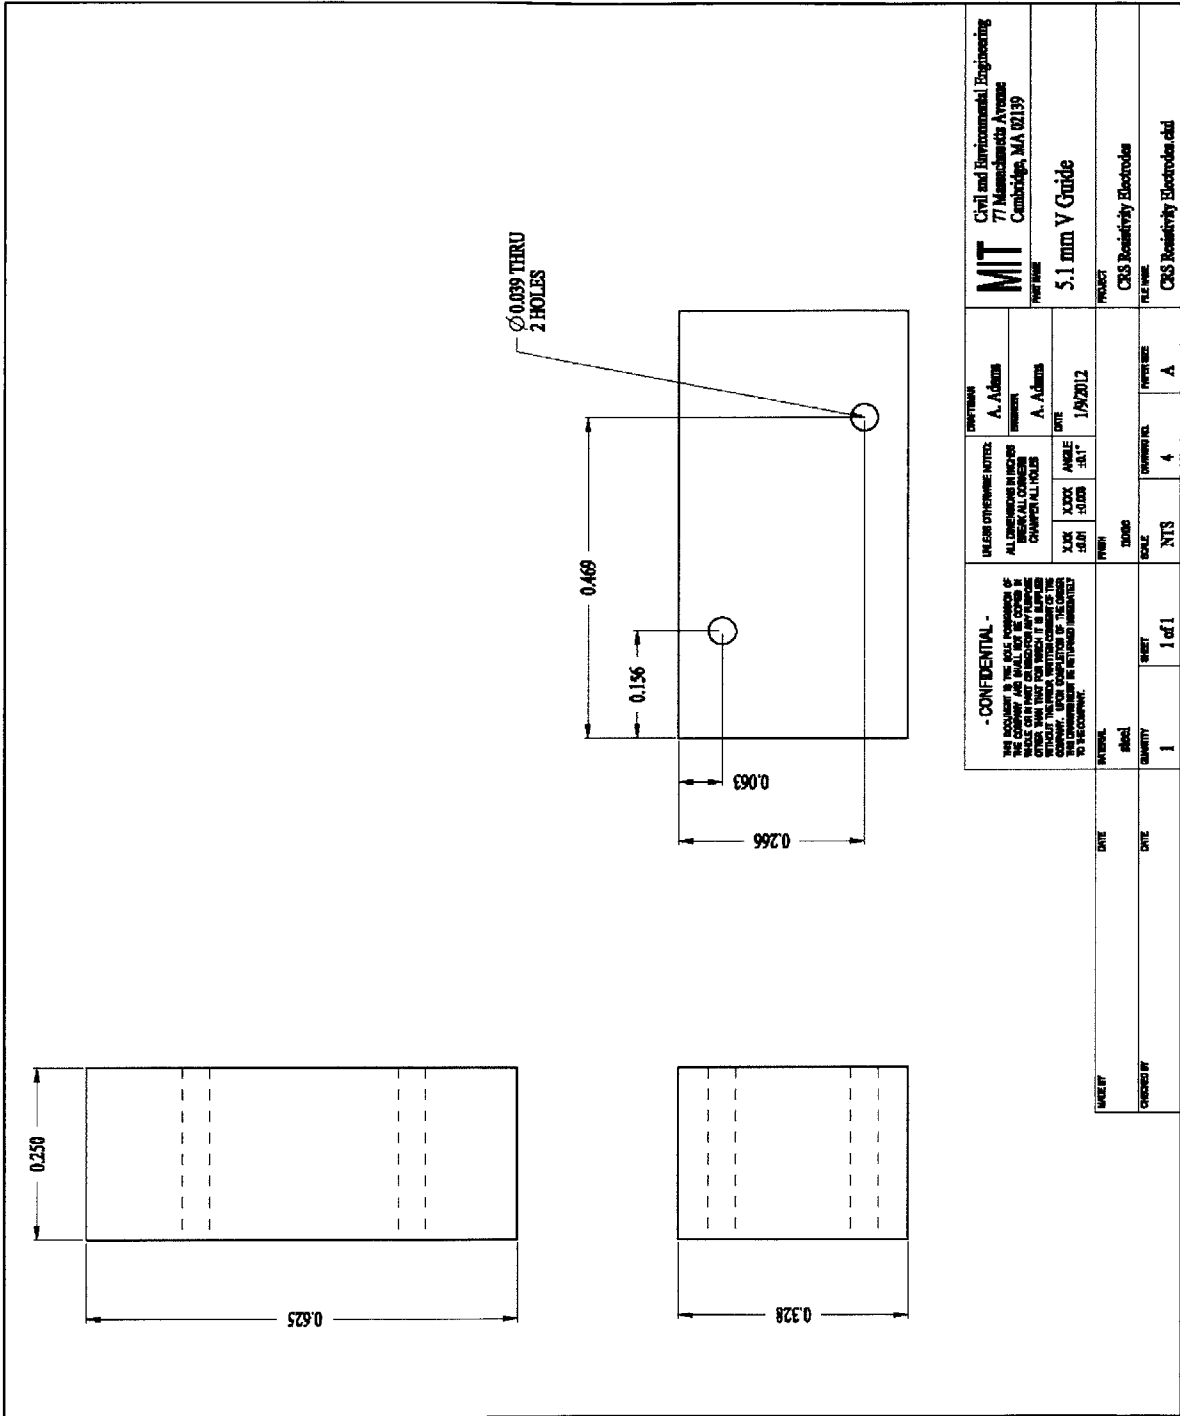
CRS Electrodes: Drawing 4, 5.1 mm drilling guide
